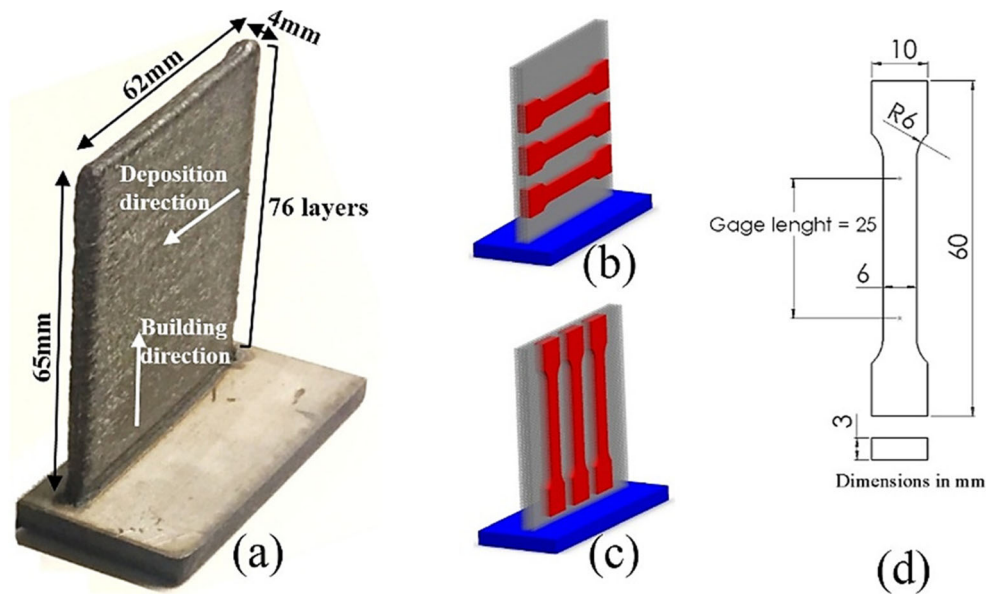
a As-built coupon used for welding. b Weld DED-P sample: tensile specimens parallel to the deposition direction. c Weld DED-N sample: tensile specimens normal to the deposition direction (d, e) welded DED parts
